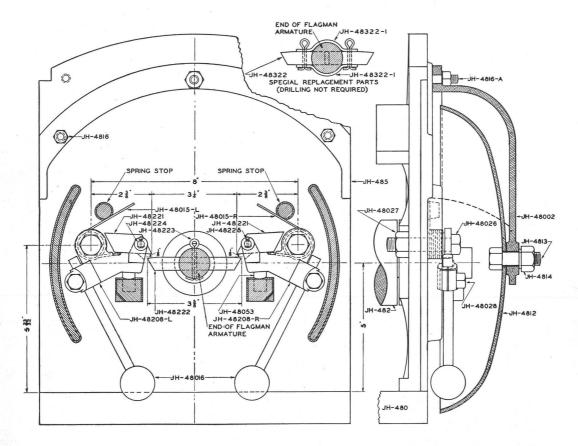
Magnetic Wigwag Flagman Mechanism — Detail Parts
